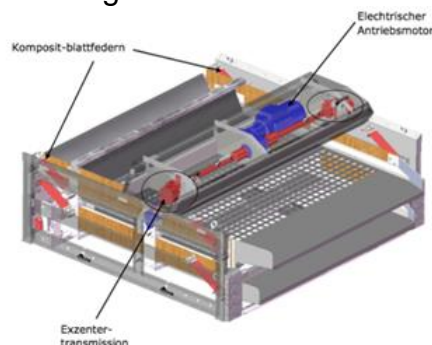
The red components show the placement of the composite leaf springs and the mechanical transmission. The blue components show drive motor and gearbox.
